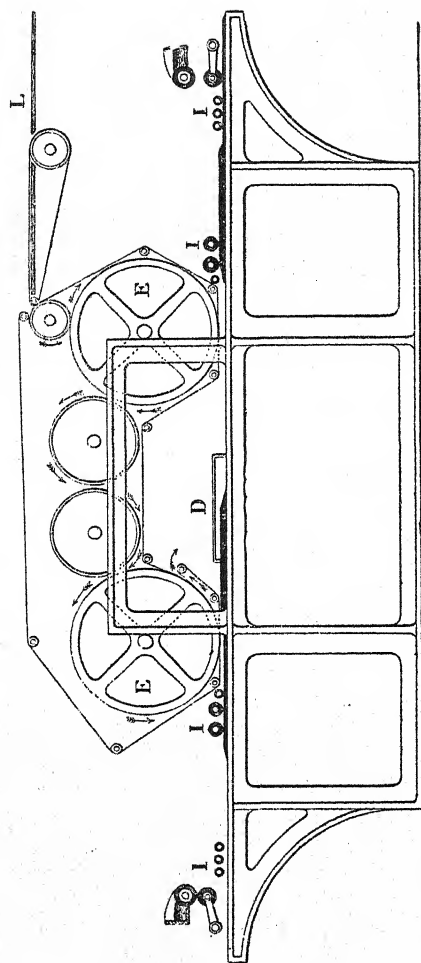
DOUBLE CYLINDER PERFECTING MACHINE.
